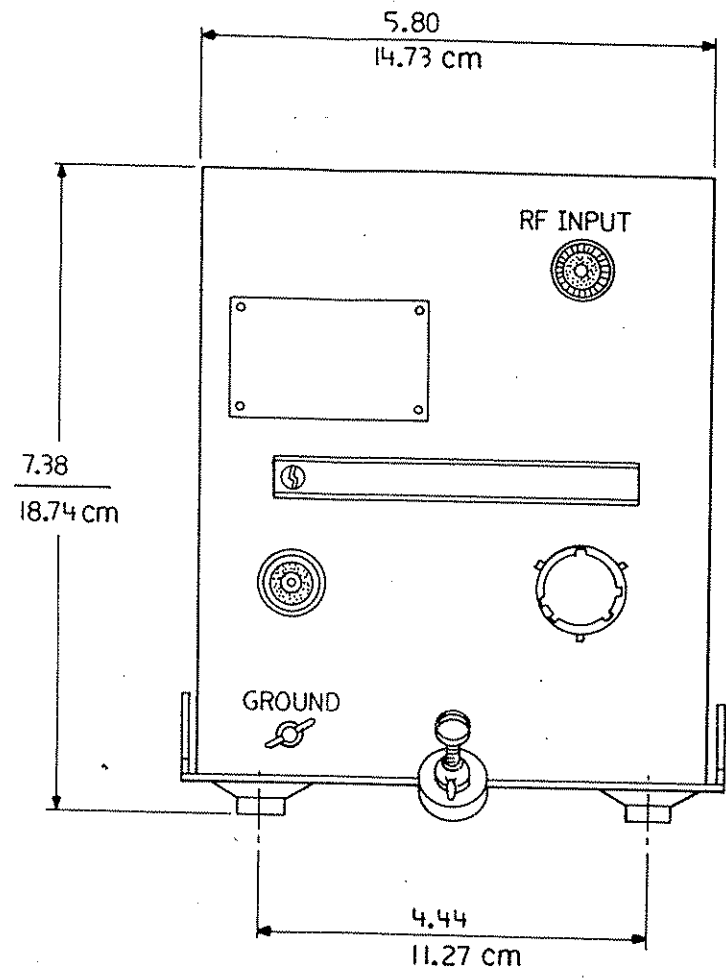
OUTLINE DIMENSIONS, ACU-150D
